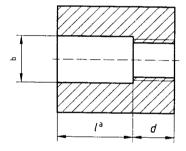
Measuring device for verifying run-out specified in Figures 42 and 43
